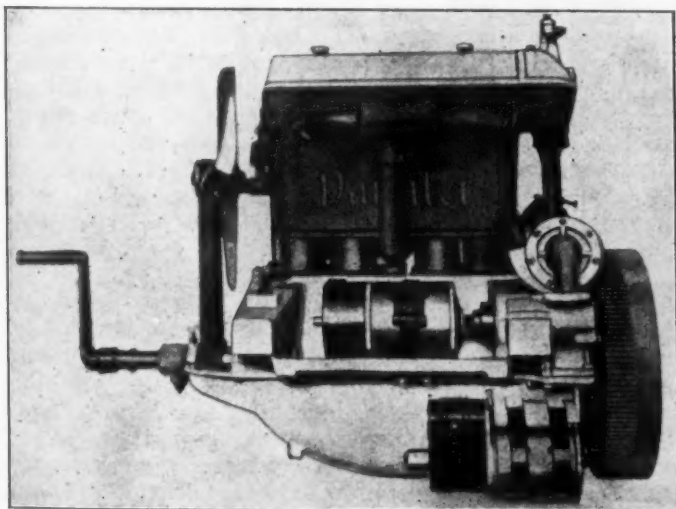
MERCEDES OVERHEAD CAMSHAFT ENGINE WITH REAR END CAMSHAFT DRIVE
